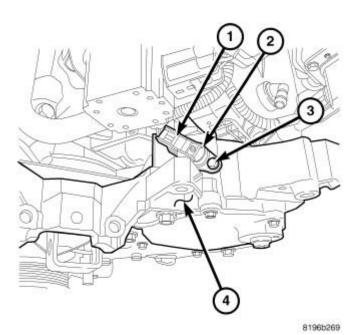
Right Side Engine Mount, Through Bolt & Nut Courtesy of CHRYSLER LLC
